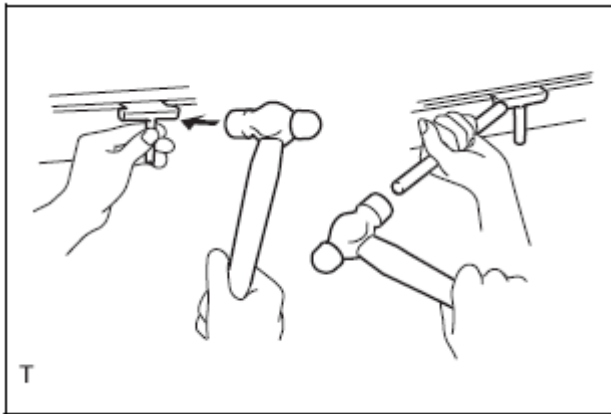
Removing Oil Pan Sub-Assembly No. 2 Using Oil Pan Seal Cutter
